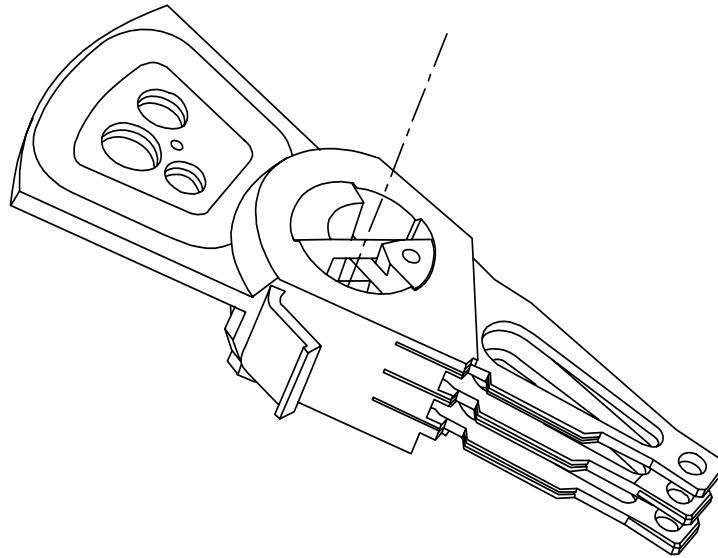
Assembly of magnetic disk drive actuator with flexural pivot.
